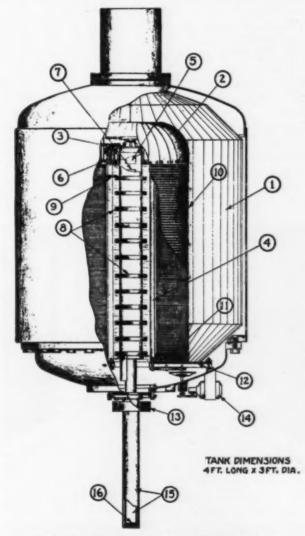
Sectional drawing of 1,000,000-volt X-ray unit
